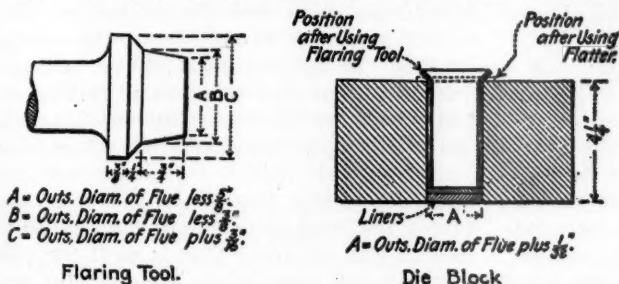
Flaring Tool and Die Block for Flange Test of Steel Tubes
